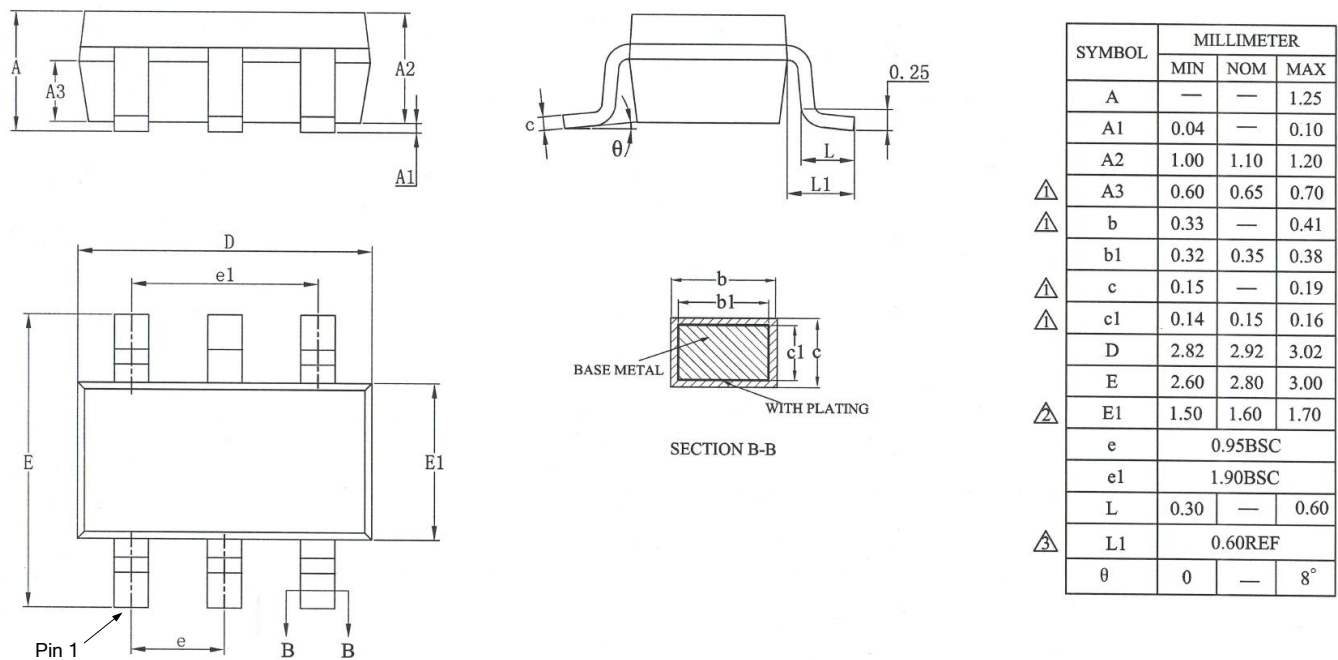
SOT23-6 Package Shape and Dimension in millimeters
